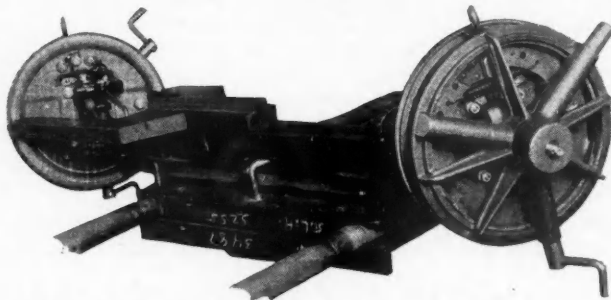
Simple yoke used for adjusting turning radius angle in production line
